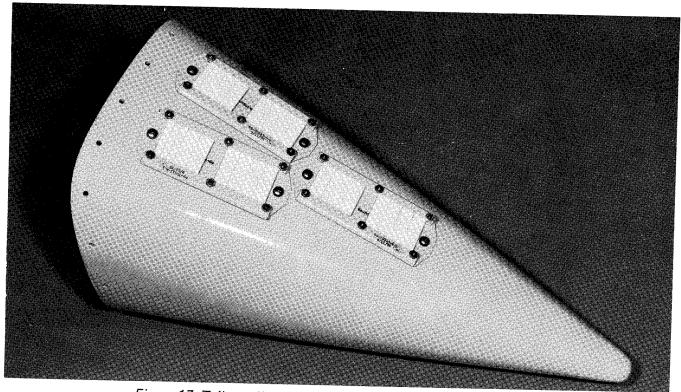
Tailcone With Shear and Flexure Specimen Fixtures Attached
